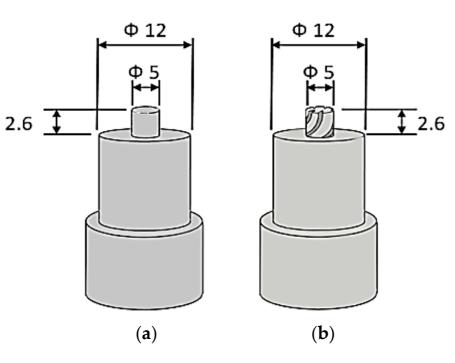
Schematic of the FSSW welding tools: (a) simple cylindrical pin tool; (b) threaded pin tool.
